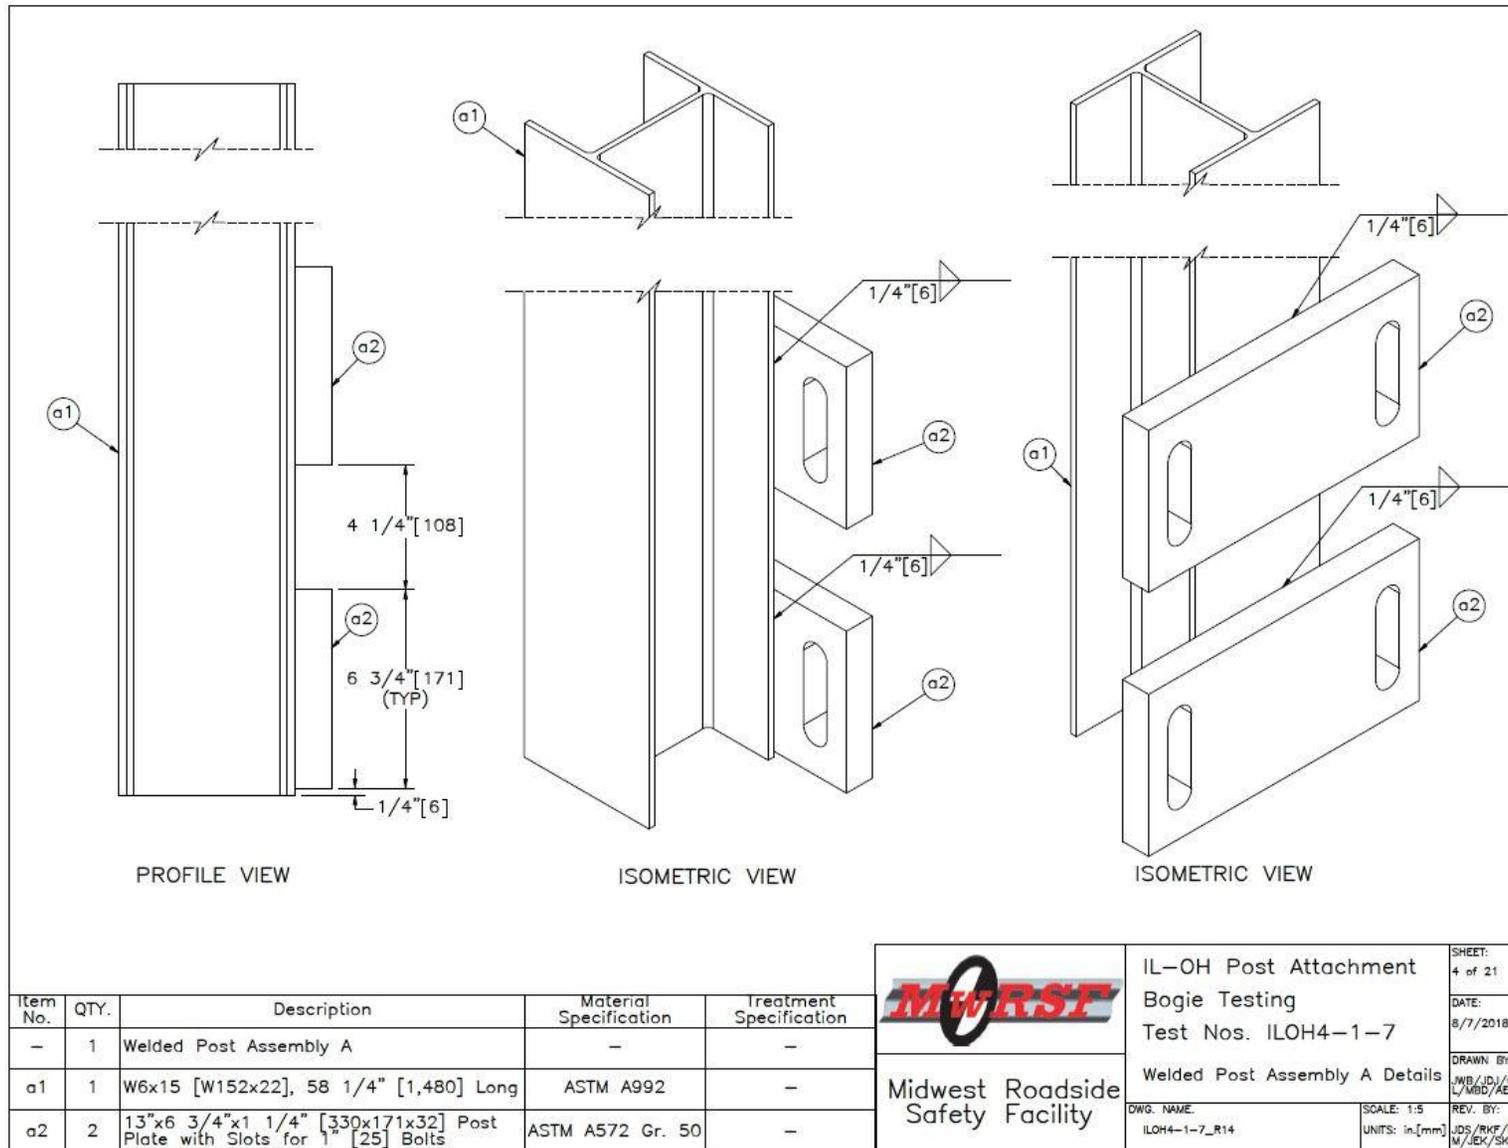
Welded Post Assembly A Details, Test No. ILOH4-1
